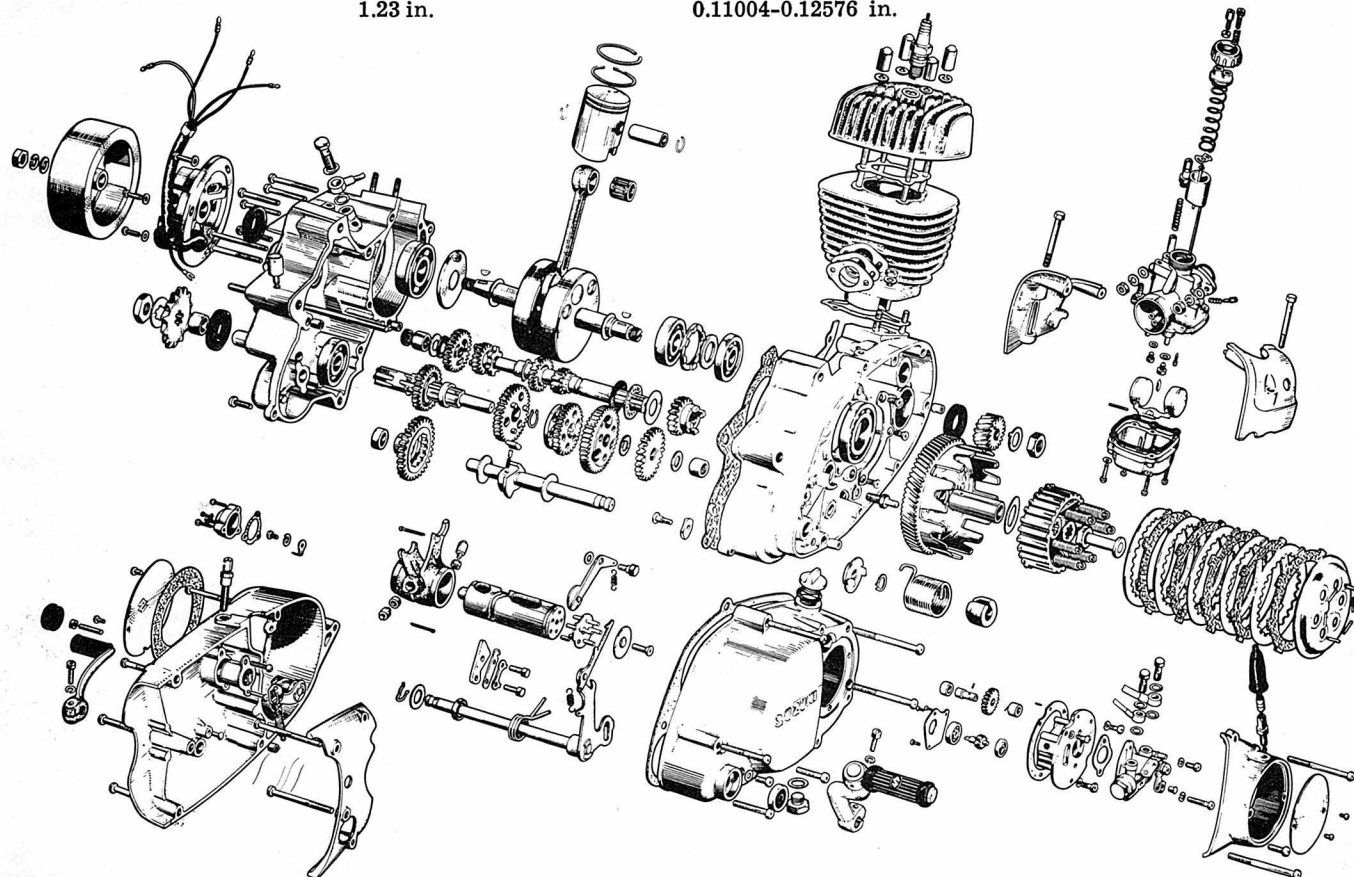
Exploded view of the engine and transmission assembly used on K10P, K11P and K15P models. Other models are similar.
